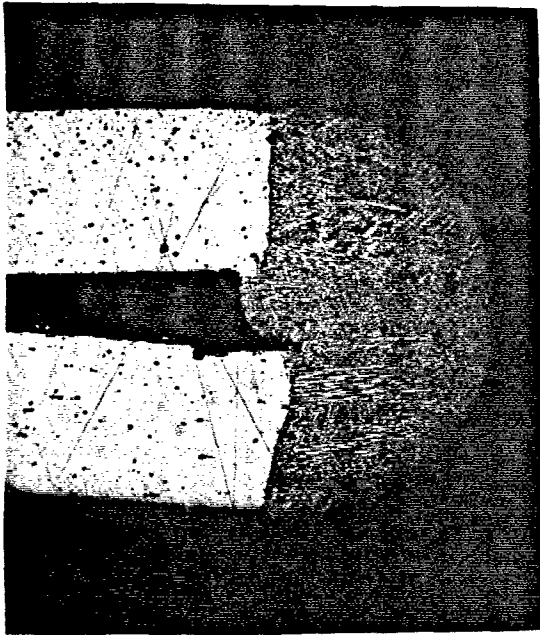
Pillow Specimen, Smooth Edge Weld
